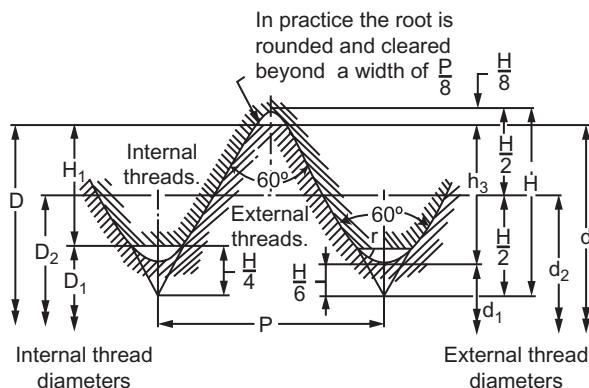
ISO metric screw thread design profiles of external and internal threads.
